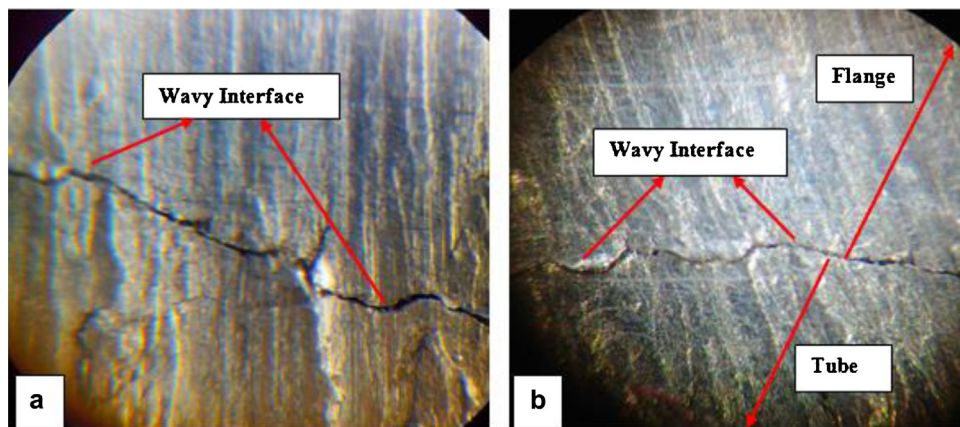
(a, b) 160 \times microscopic image showing the wavy interface of the welded tube-flange pair.
